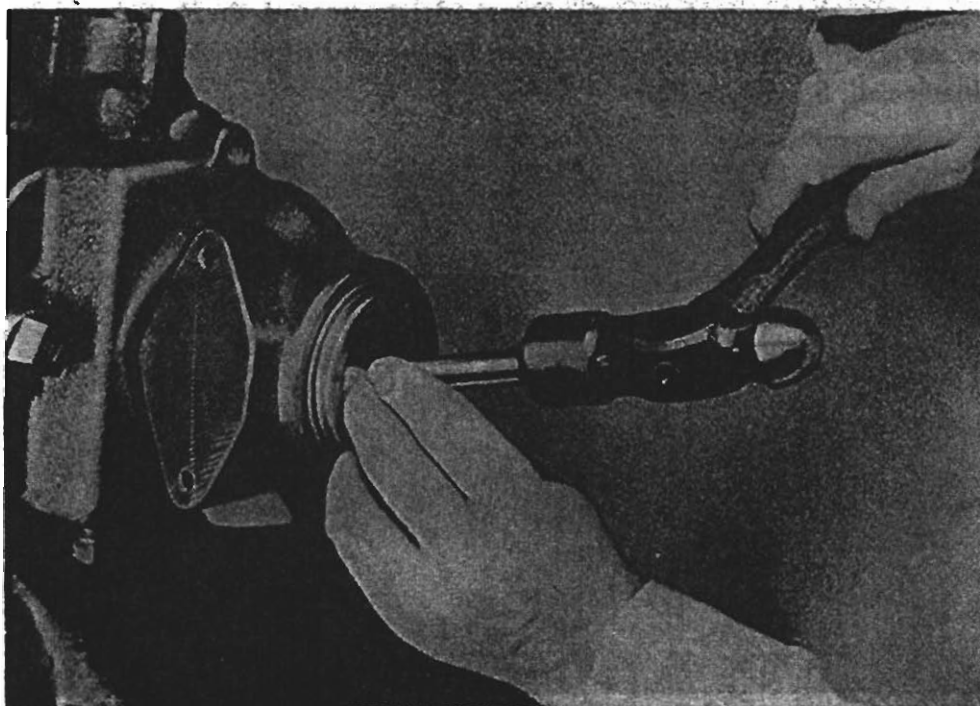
To Engage the Cam, Work the Lever and Shaft Outward as Far as Possible.
